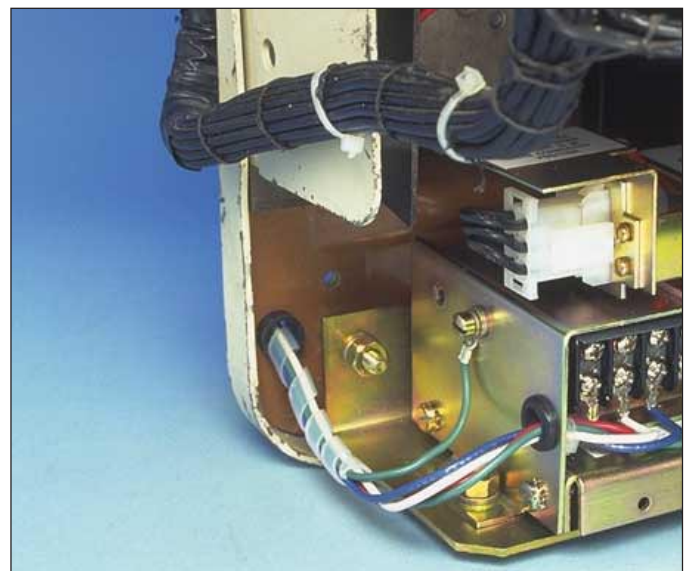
Routing of the Sensor Harness – Non-Fused Breakers
